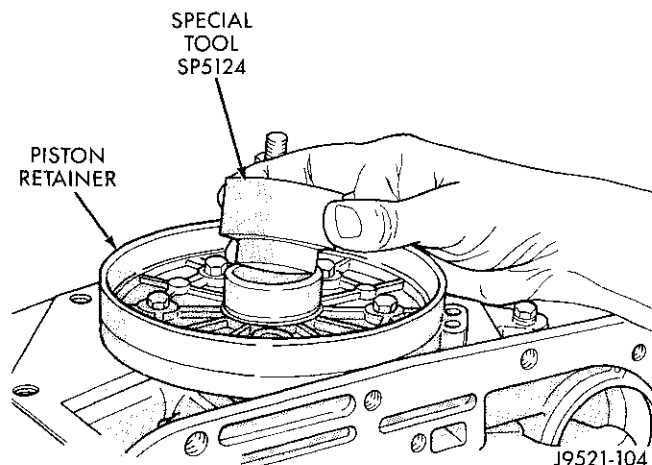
Positioning Adapter Tool In Overdrive Piston Retainer
